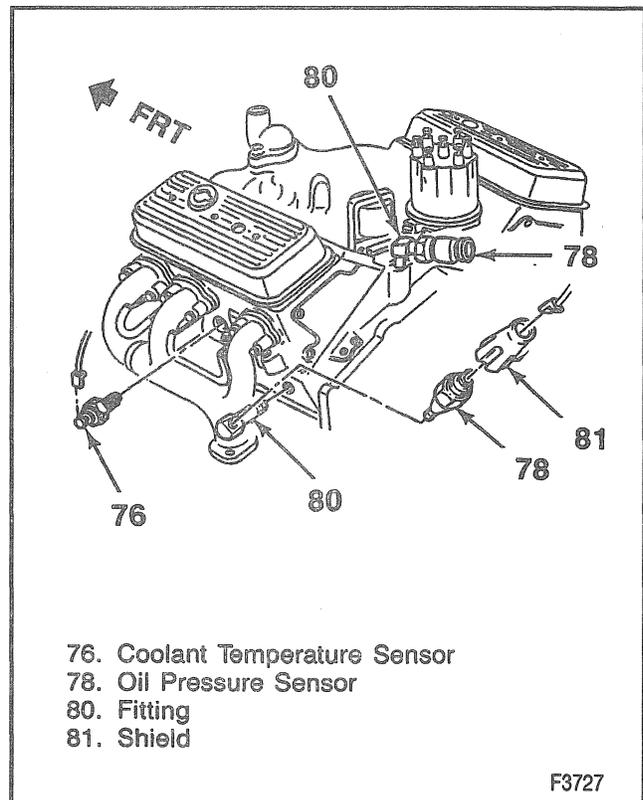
Coolant Temperature and Oil Pressure Senders (4.3 L Engines)
